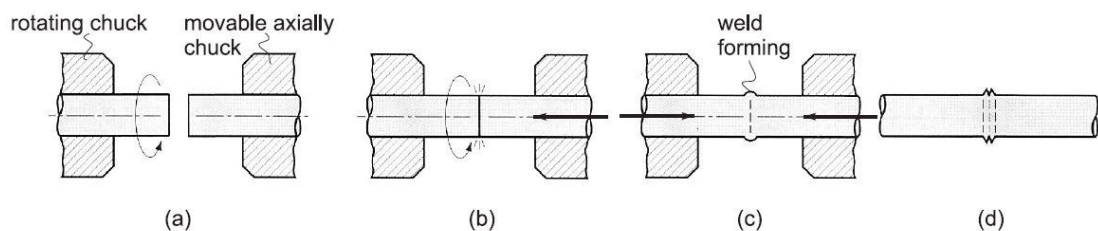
Inertia friction welding: (a) no contact, (b) parts brought into contact to generate friction heat, (c) rotation stops and axial pressure applied, (d) final product showing the flash (34)
